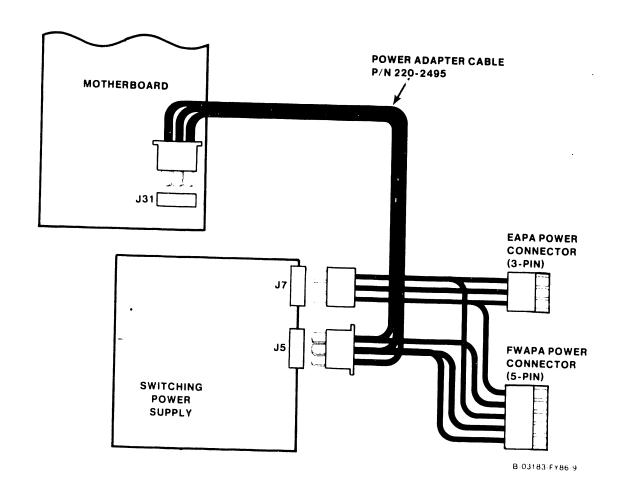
A. Power Supply Cable Adapter Assembly Connections
